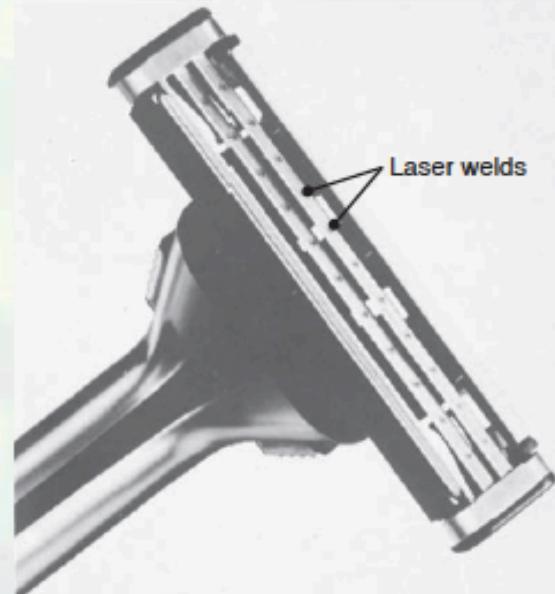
Gillette Sensor razor cartridge, with laser-beam welds.
